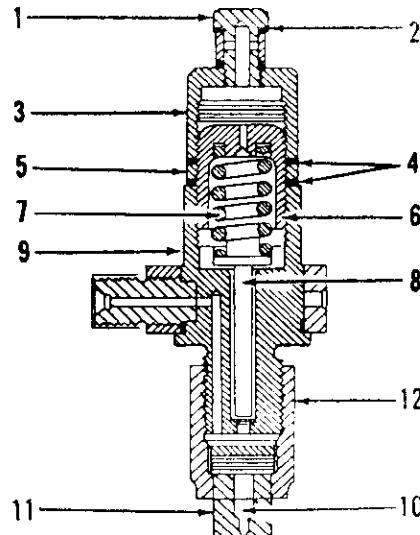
Cross-sectional view of injector nozzle and holder assembly. Refer to Fig. 52 for an exploded view.
